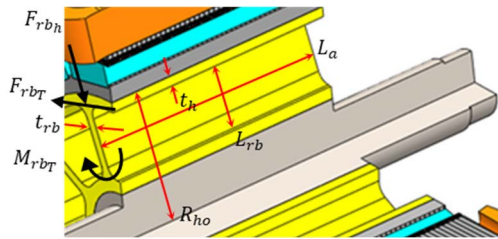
Dimensions and acting loads on a single rib in spoked hub design.
